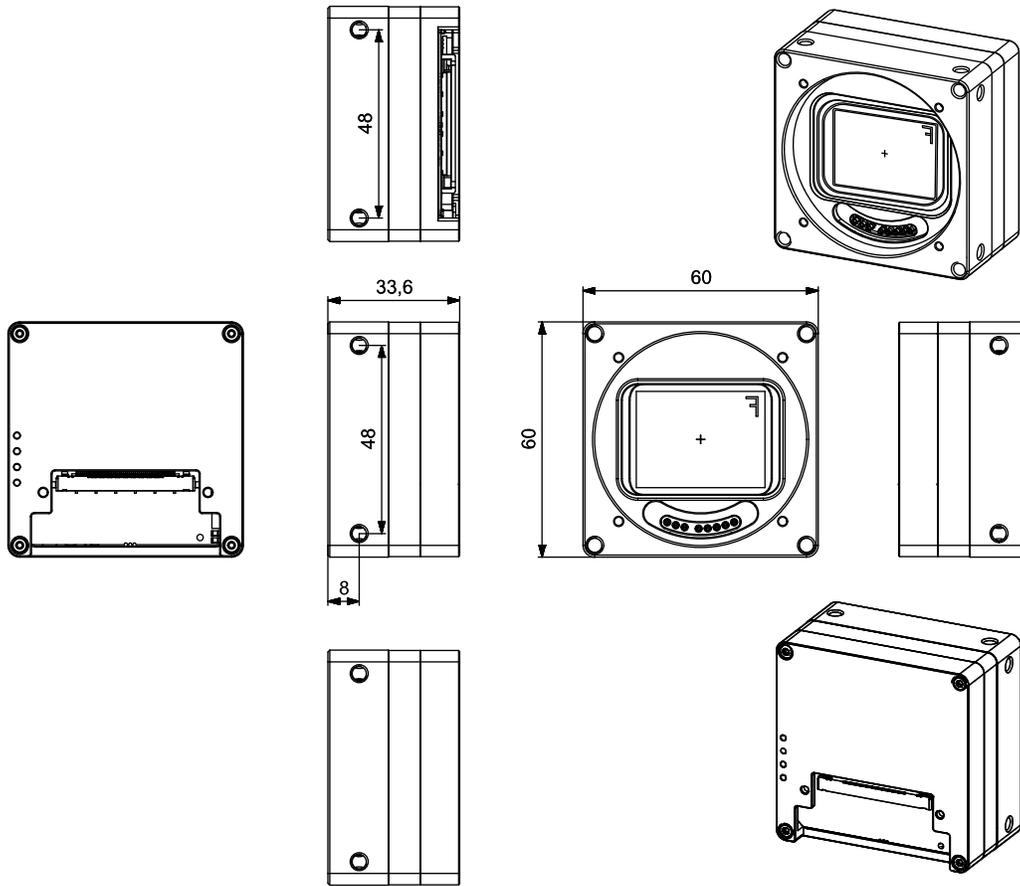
Dimensional drawing of MX200xG-CM-X4G2-FL
